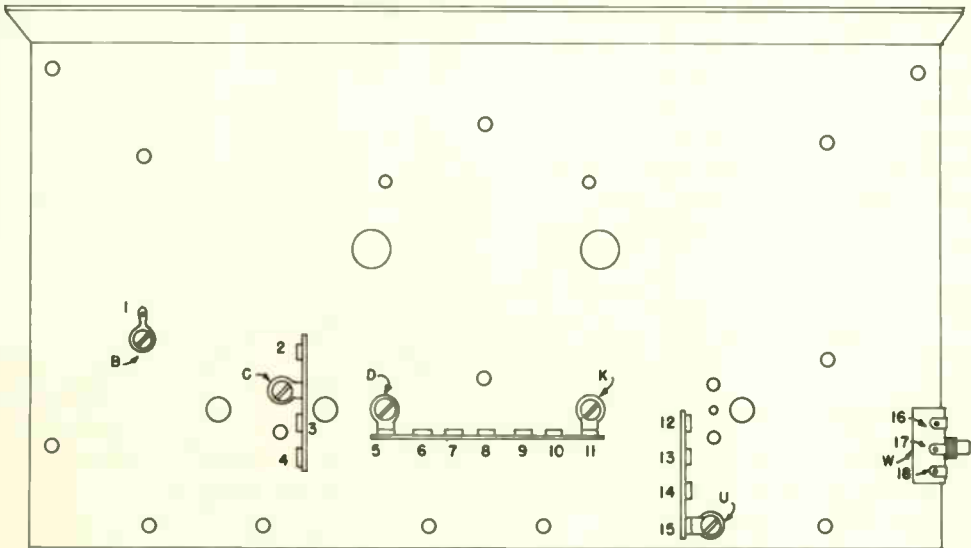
Parts mounted on the chassis and the terminal identification number.
